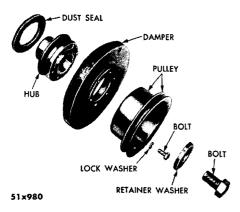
Vibration Damper Assembly (Disassembled View)
